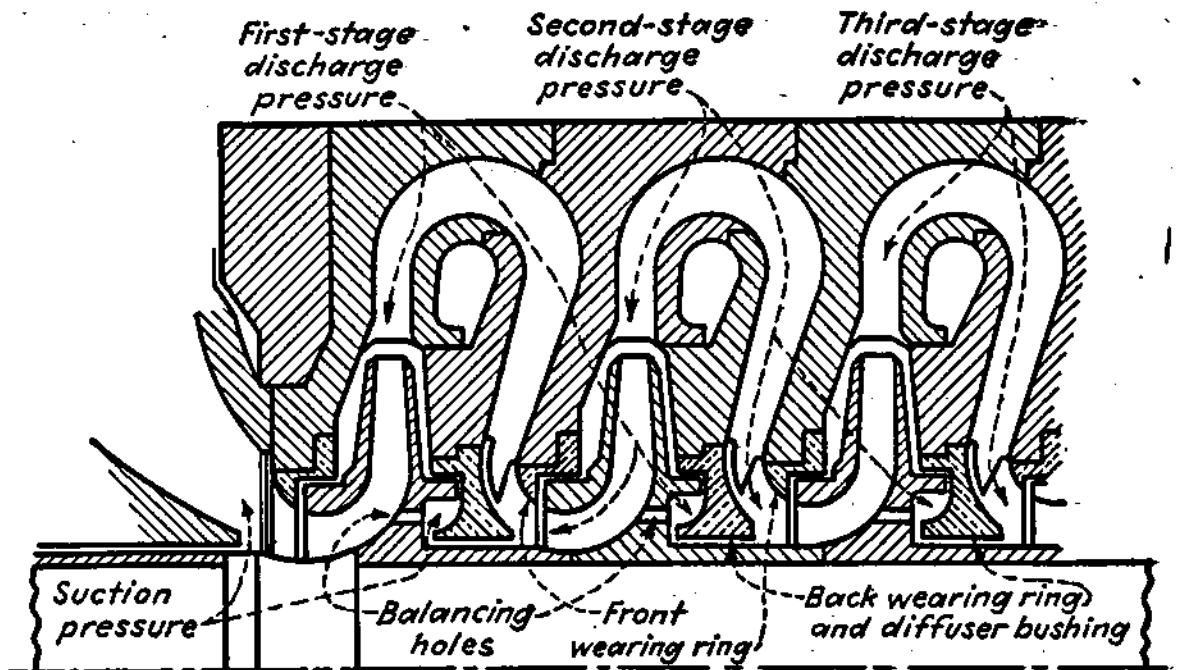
Multistage pump design incorporating impeller design shown in Fig. 1-60.
